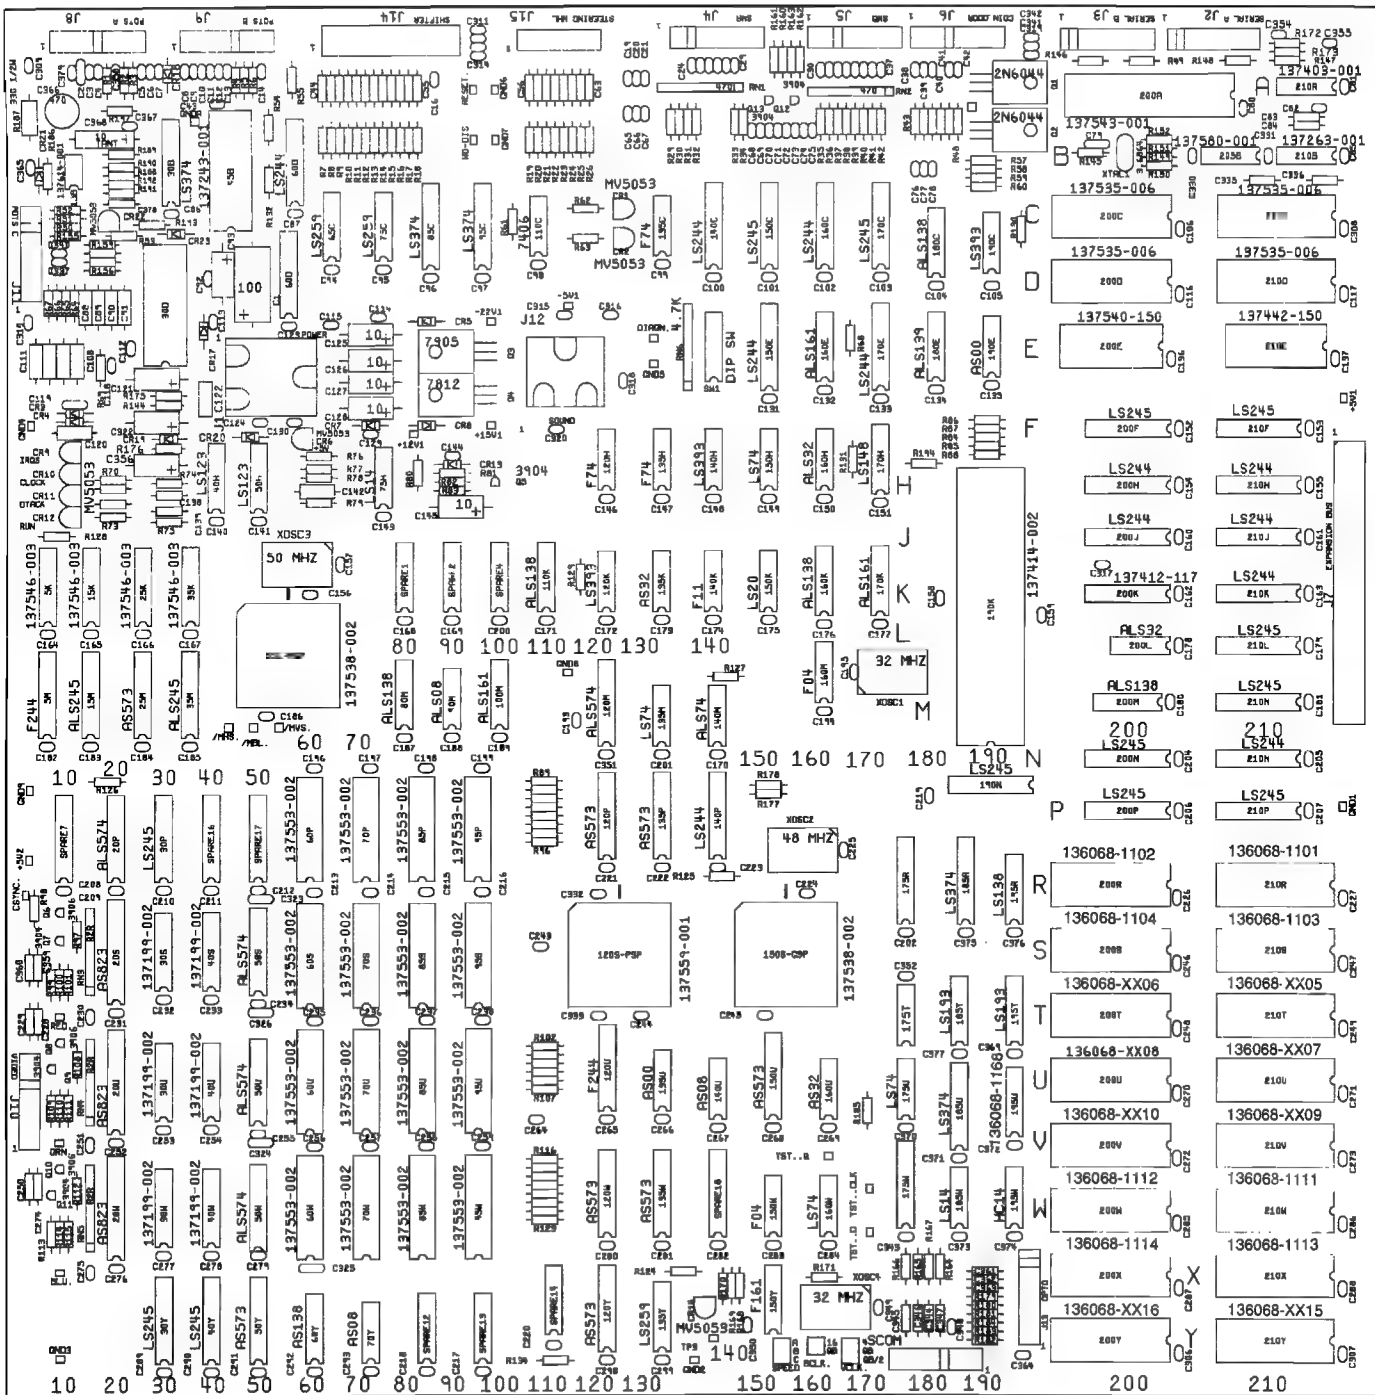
Hard Drivin' Compact Main PCB Assembly
